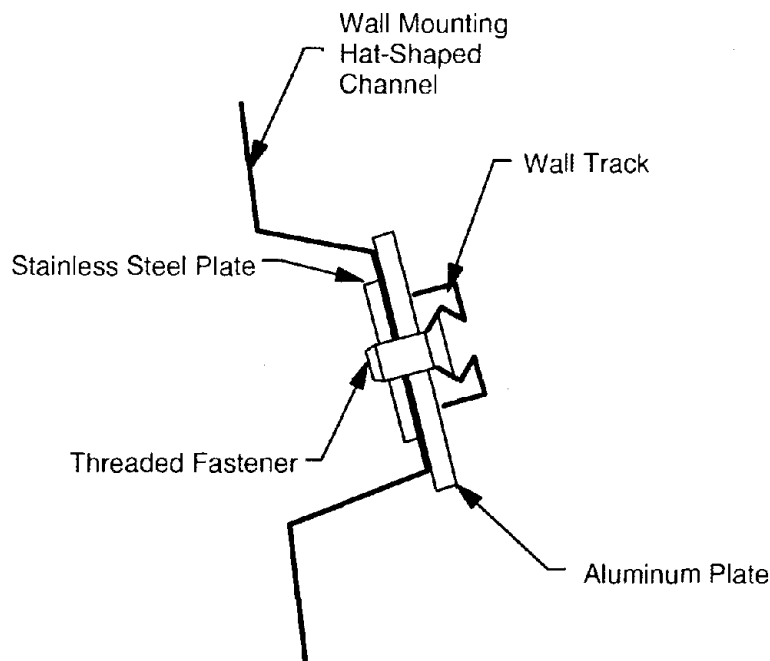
Sketch of Wall Track Mounted on Hat-Shaped Channel
